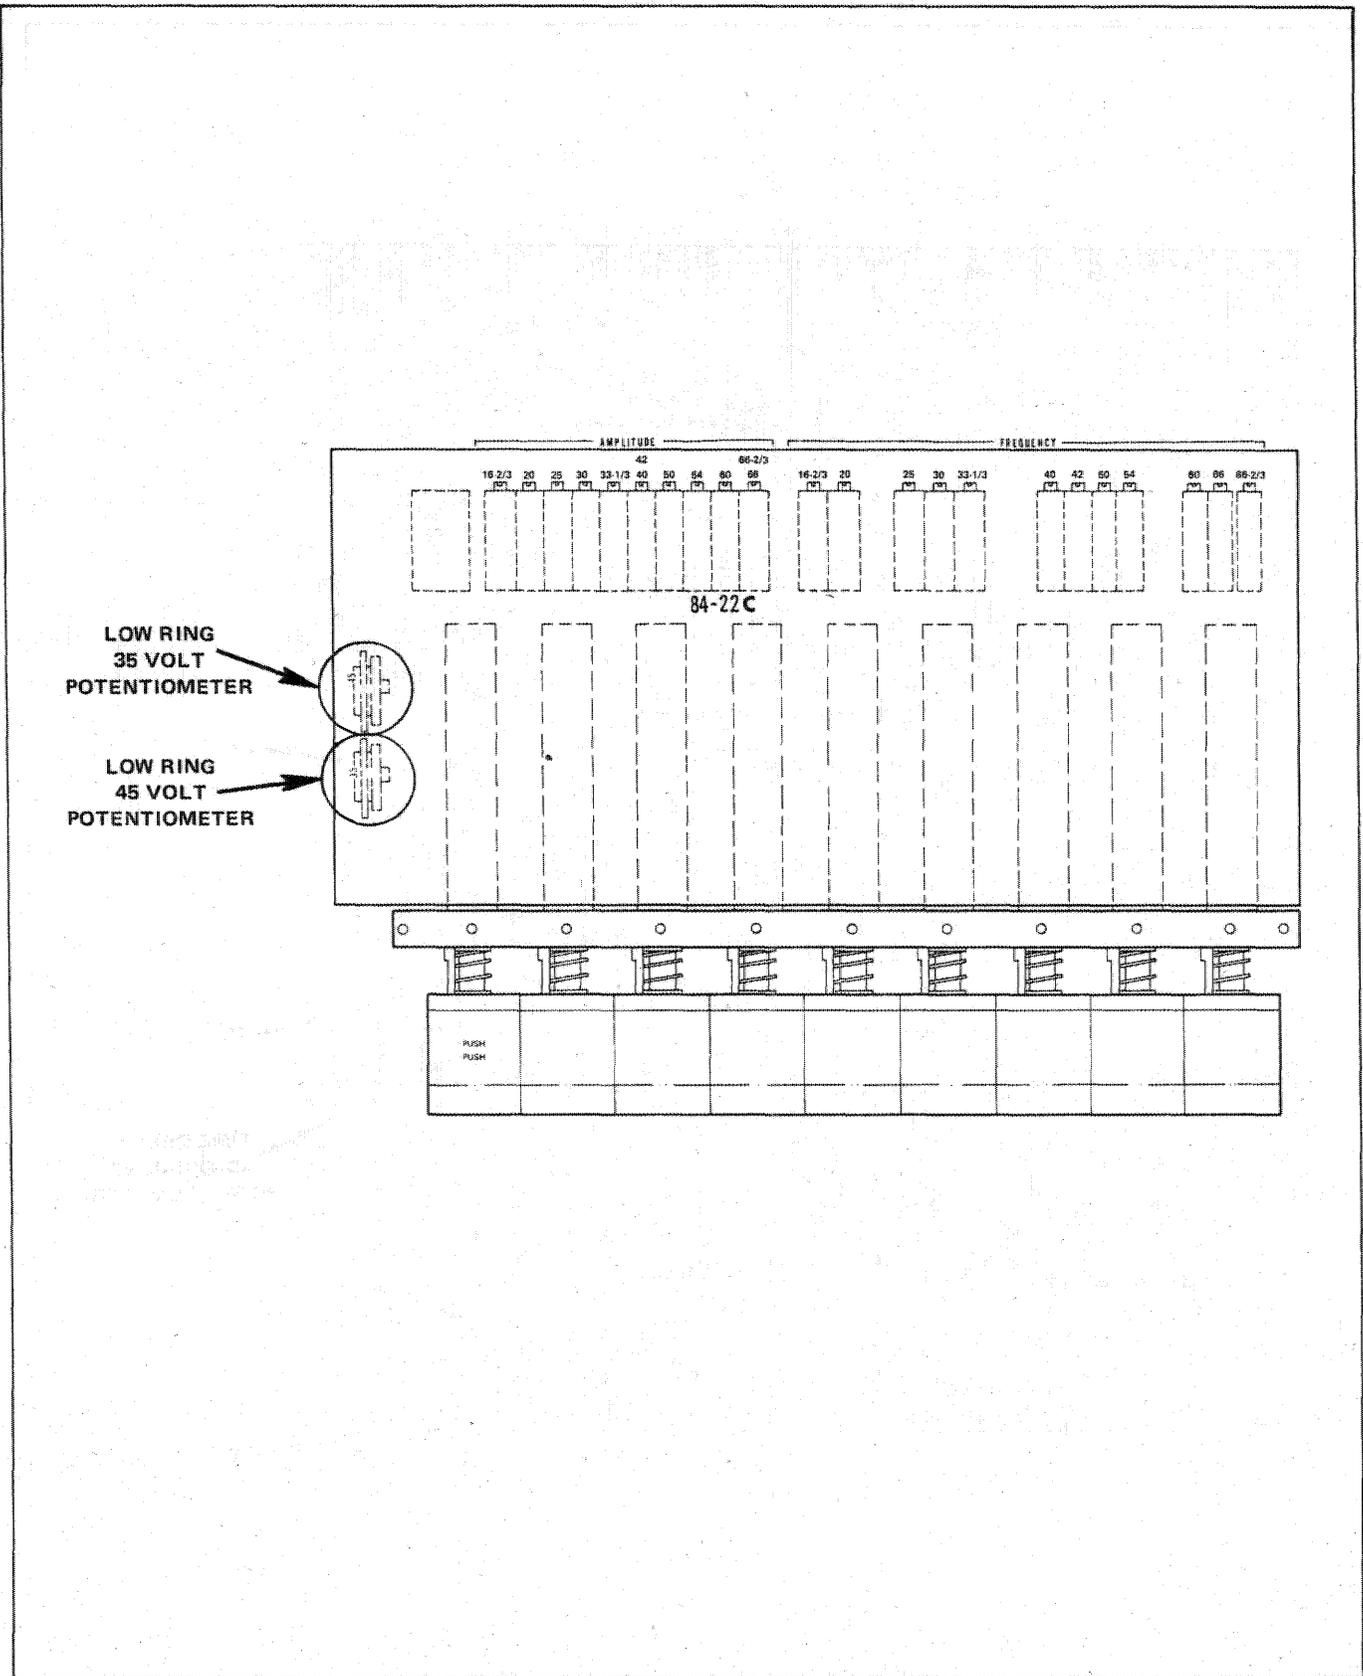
Card Assembly No. 22 (Tuned Ringer Switch Assembly), Adjustment Locations
